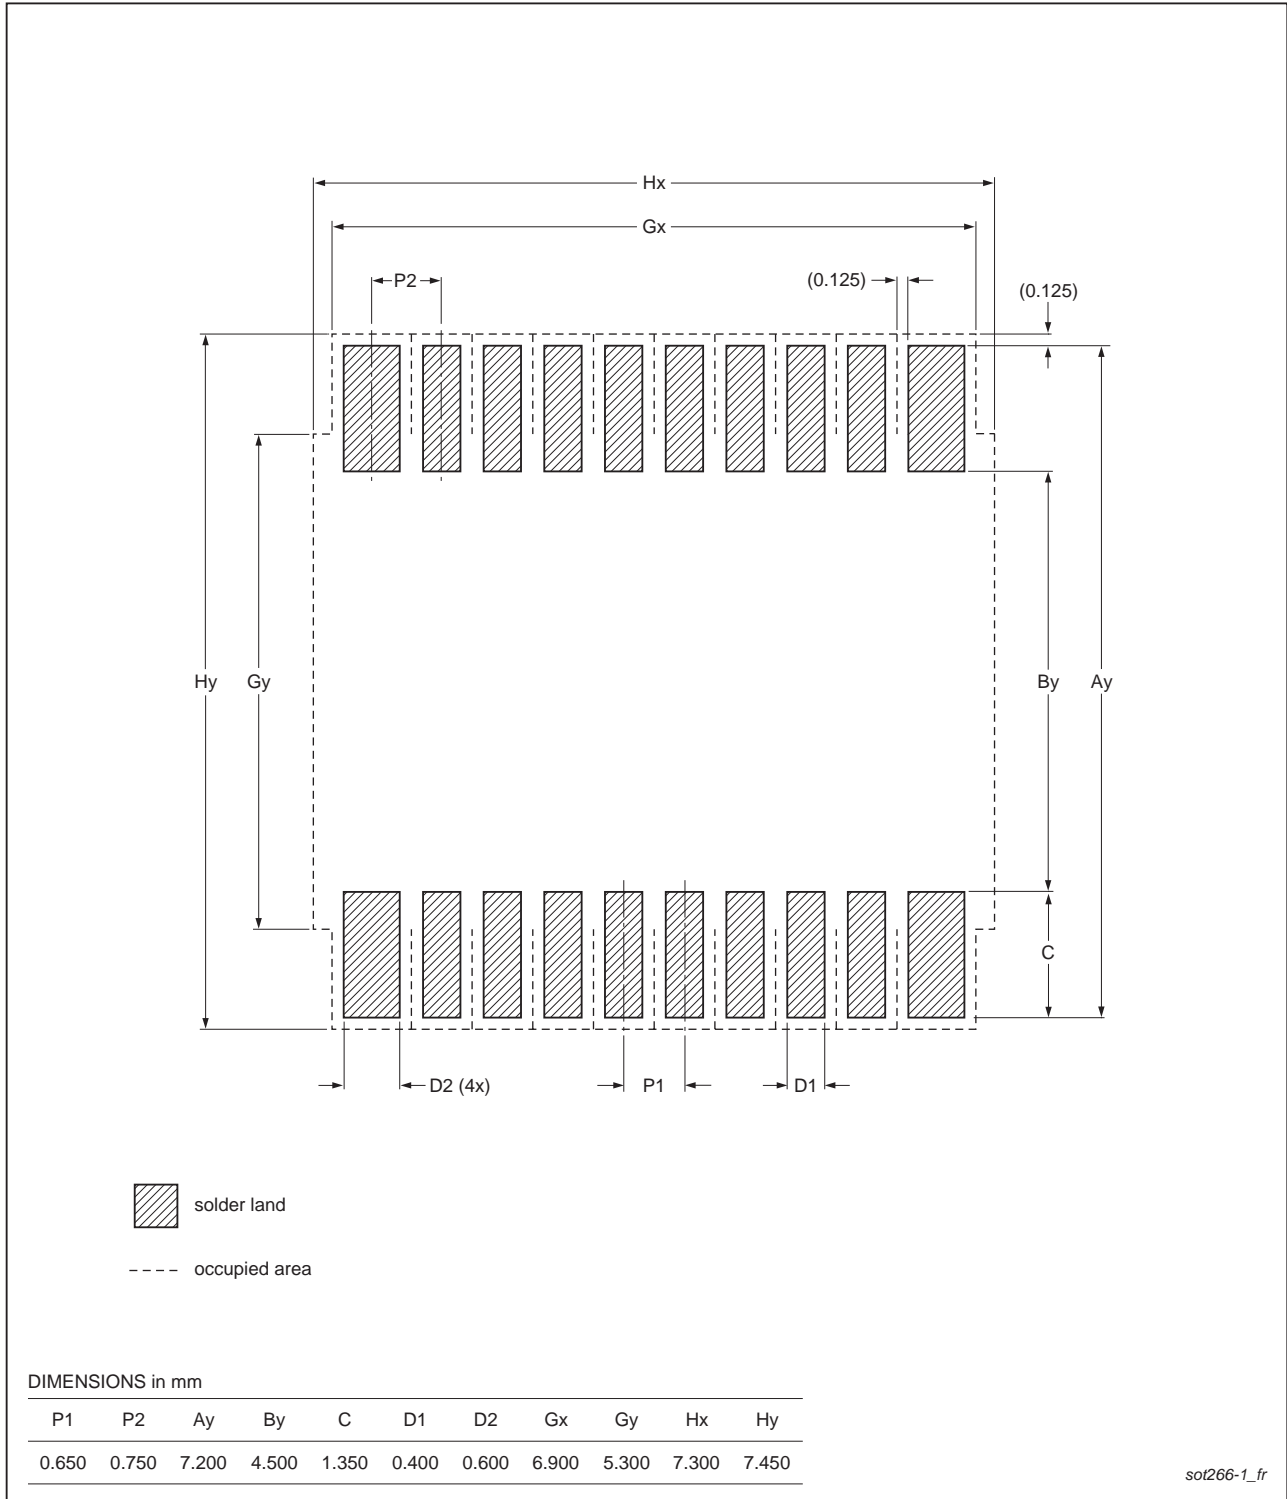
PCB footprint for SOT266-1 (SSOP20); reflow soldering
